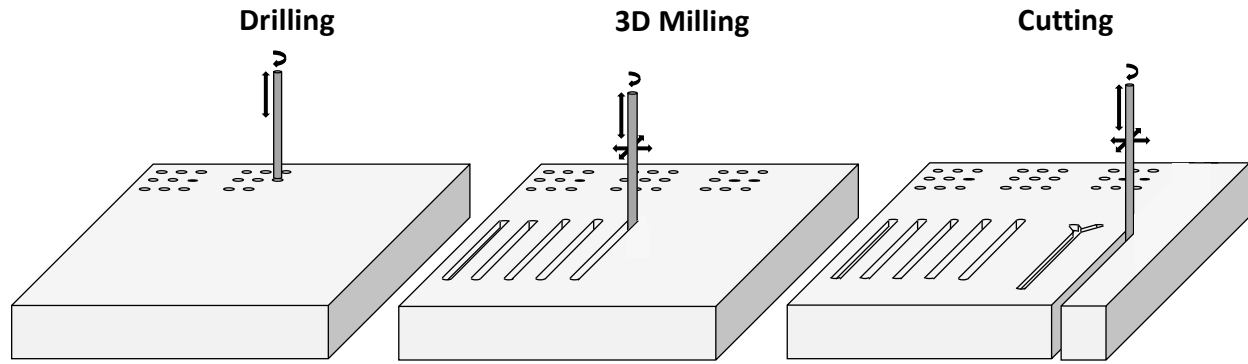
A graphic highlighting 3D drilling, milling, and cutting machining operations performed on the same glass substrate.
